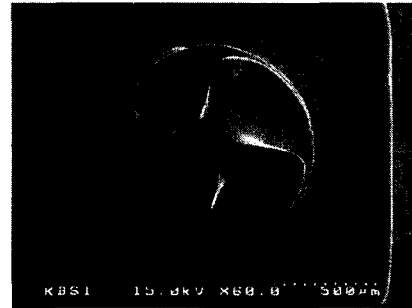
Helical gear made erroneously by micro-casting process(Materials: Bi-Sn alloys, casting temperature 150°)
